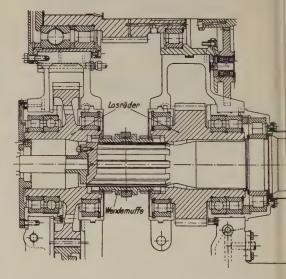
Clutch of the reverse gear of the Voith LT 306 r. transmission. Owing to the fitting of the loose gears in the gearbox, there is a relative movement in all the bearings at all positions of the reverse gear clutch, which eliminates the defect inherent in the T 36 transmission of all the bearings turning at the same speed.
